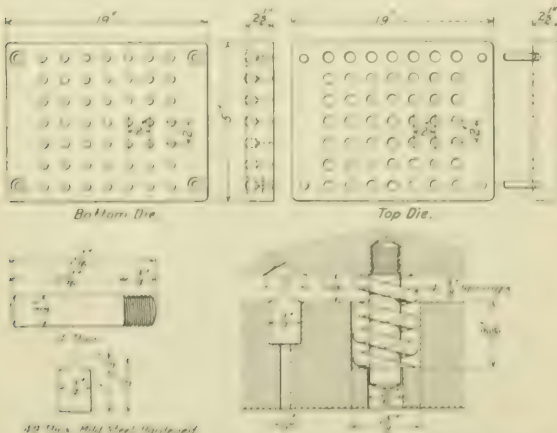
Dies for Stamping Steel Running Boards and Steps.
